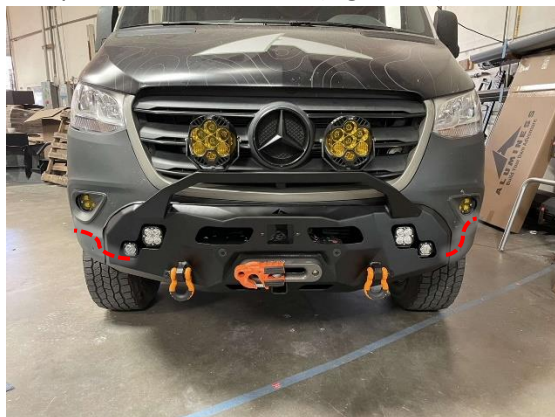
Parking Sensor Wiring Harness Routing For Factory Bumper
